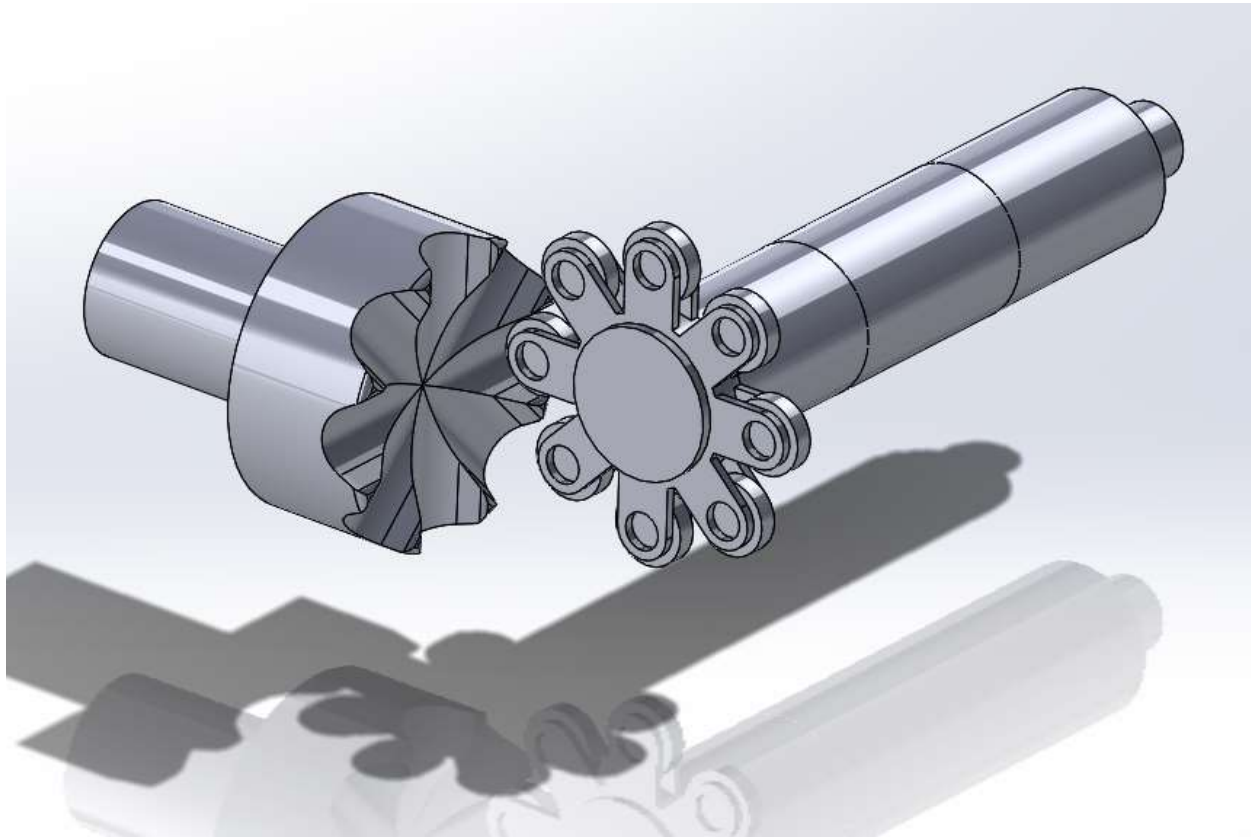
Spiral Bevel Gear Concept Drawing
